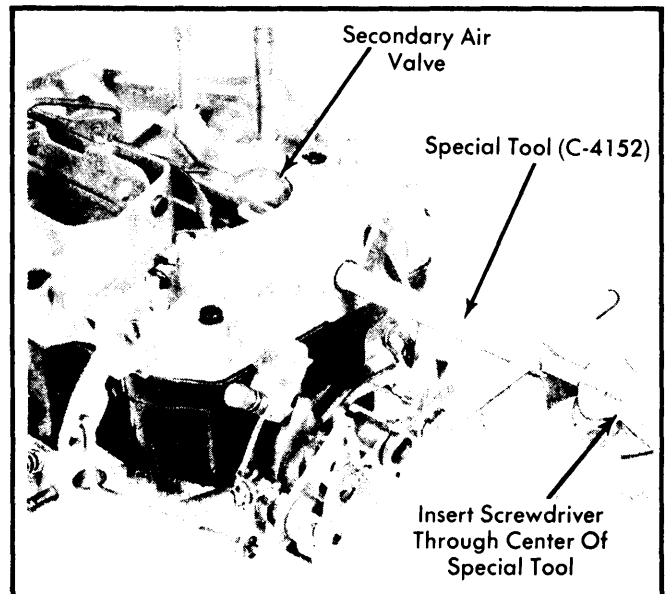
Adjusting Secondary Air Valve Spring Tension
